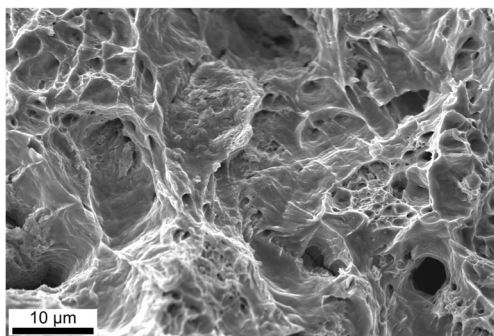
Representative fractograph of welded joint without a notch
